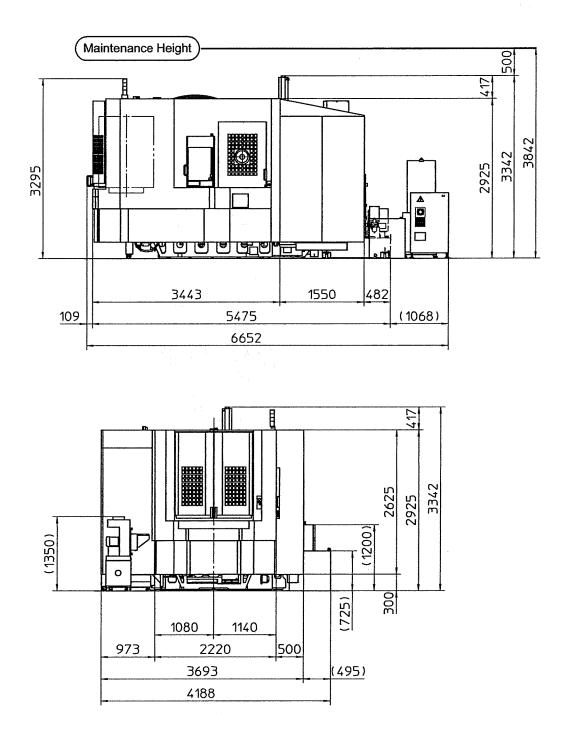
Front and Side View of Machine: a81 (Tool Magazine A60 and Left Discharge Lift-Up Conveyor Spec.) (
